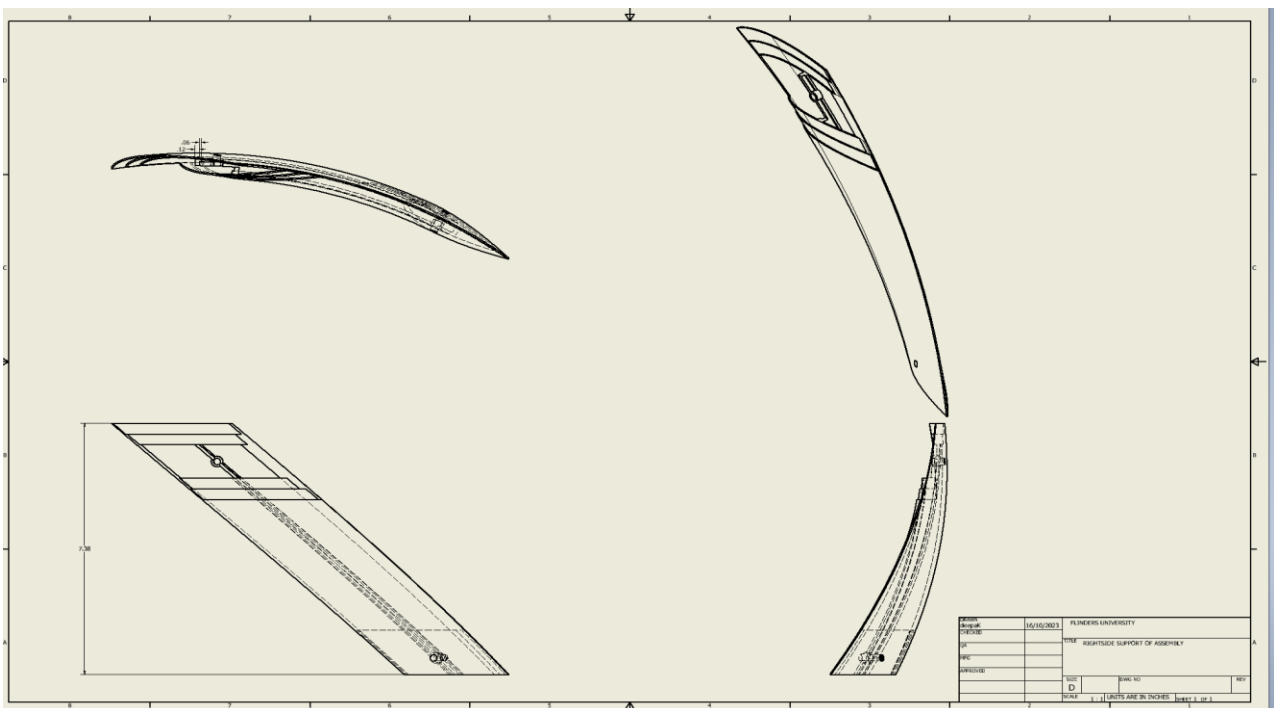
CAD drawing of Right Side blade (against the direction of strain gage)
